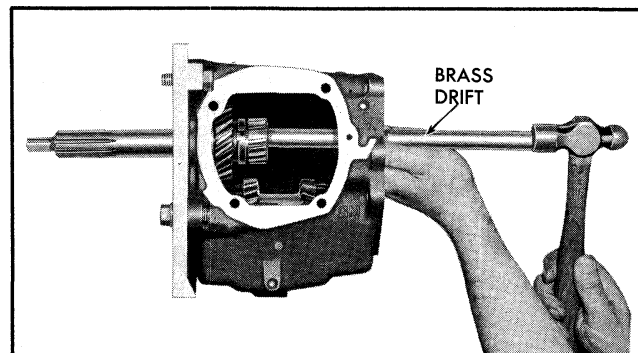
Installation of Main Drive (Clutch) Gear Assembly
